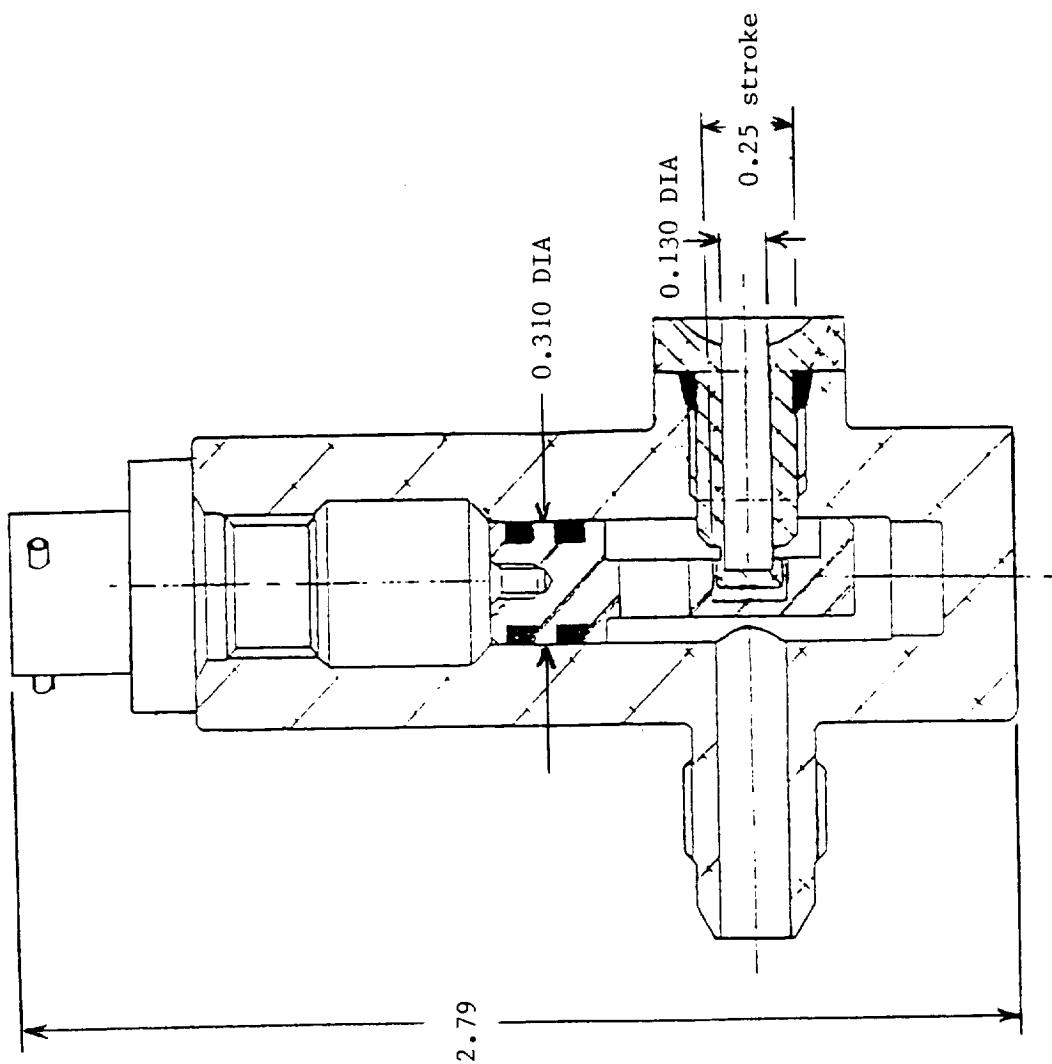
Cross sectional view of Scot pyrovalve. The body and outlet is aluminum.
